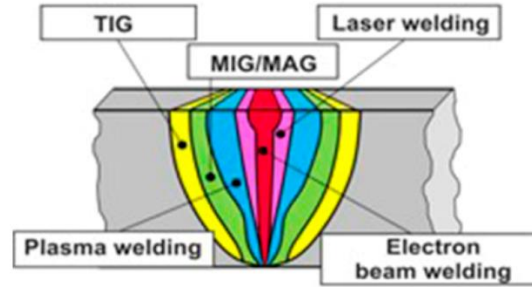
The affected area on the welded piece in different fusion welding techniques.
